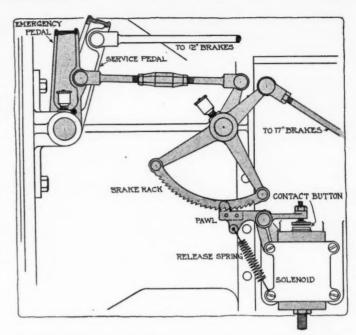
Showing connection of emergency brake pedal through solenoid brake lock
